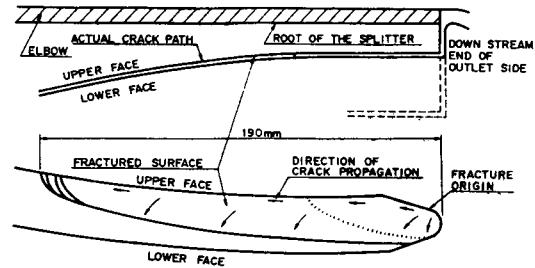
Schematic view of fracture surface of splitter plate.
